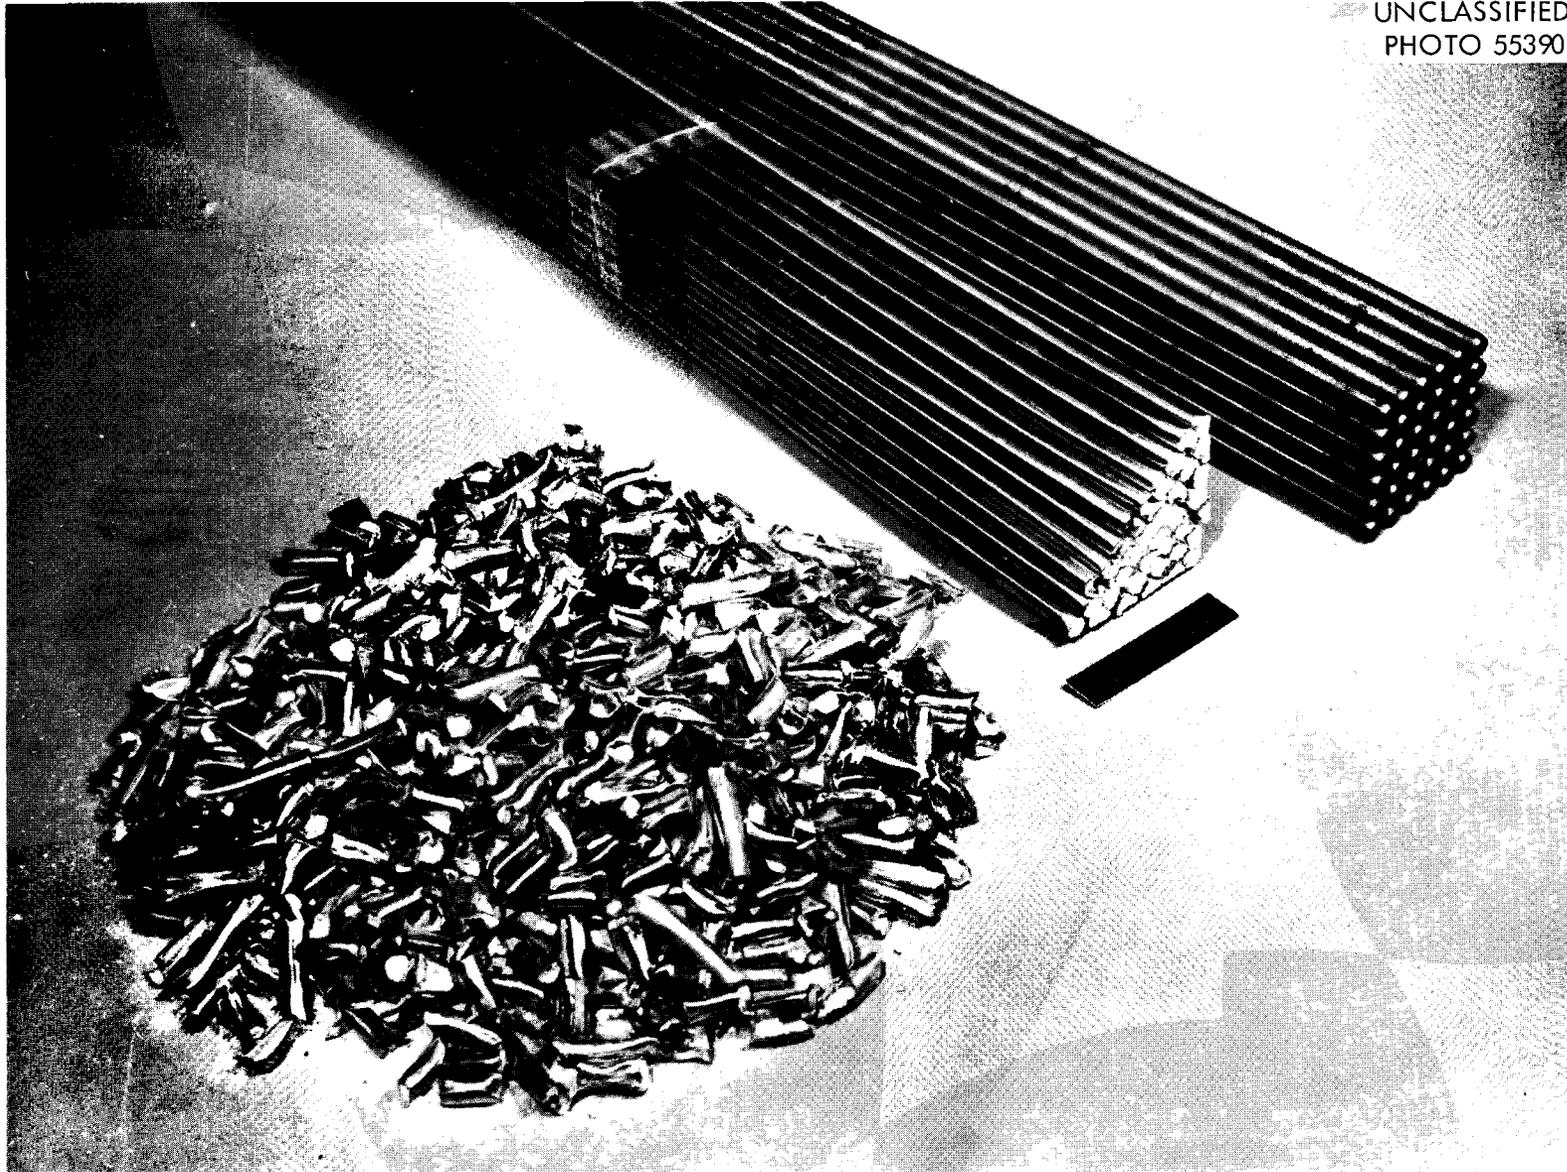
ORNL MARK I PROTOTYPE FILLED WITH PORCELAIN BEFORE AND AFTER SHEARING WITH STEPPED BLADE COMPARED WITH PRODUCTS OF SHEARING A COMPLETE ASSEMBLY 72 INCHES LONG.
